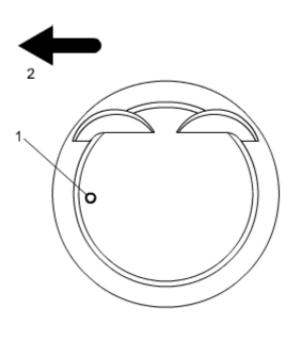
Identifying Connecting Rod Bearing Installation Position Courtesy of SUZUKI OF AMERICA CORP.
